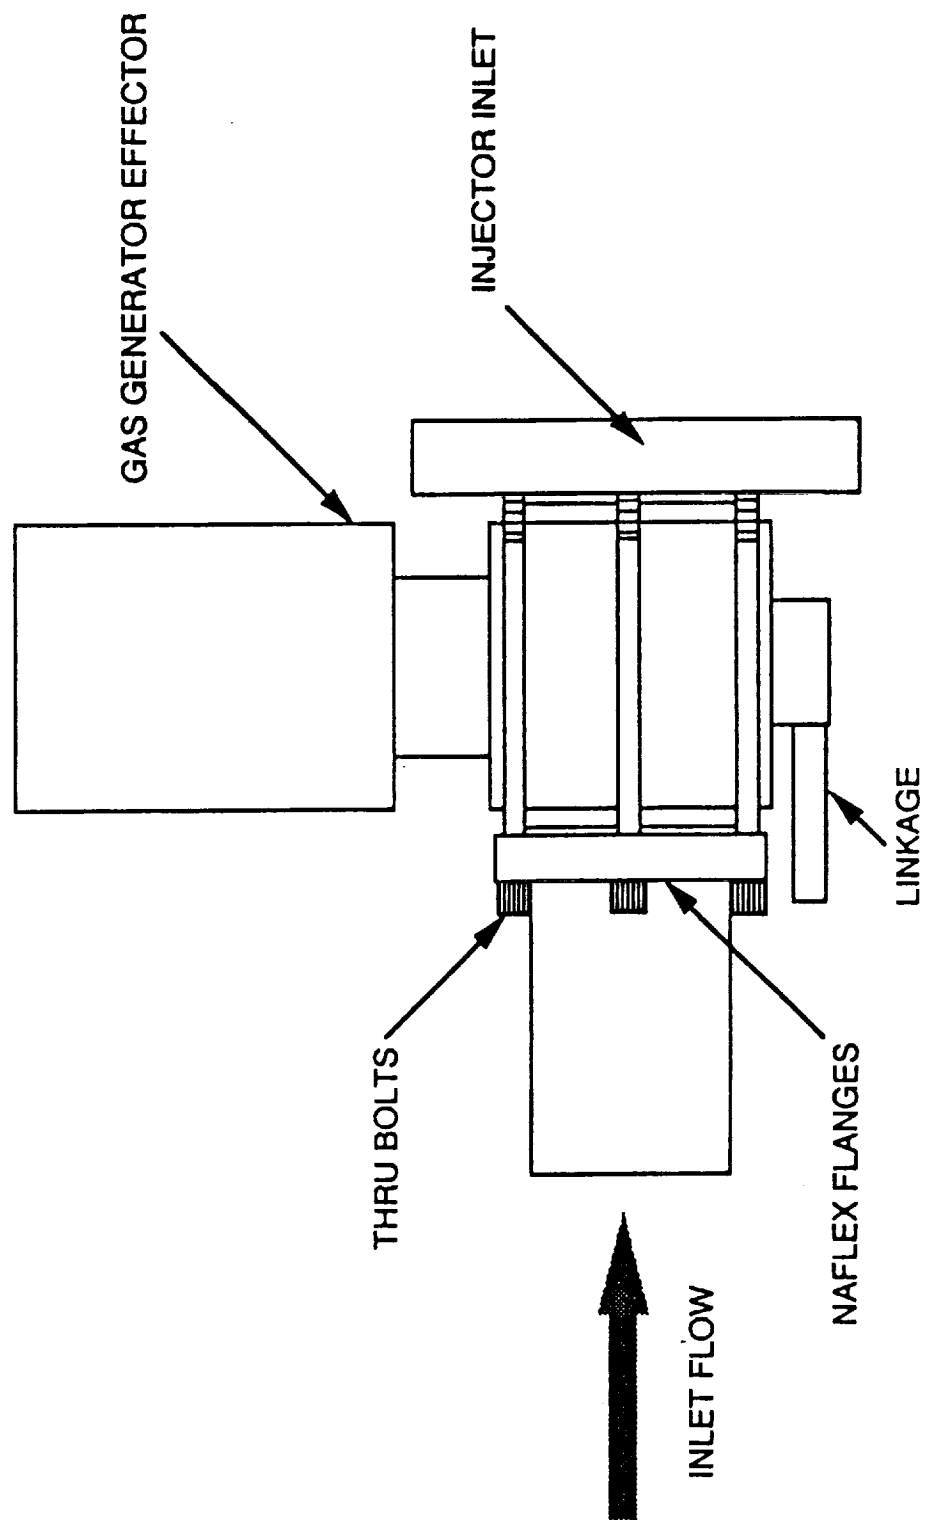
Gas Generator Valve Clamped Between Interface Flanges
